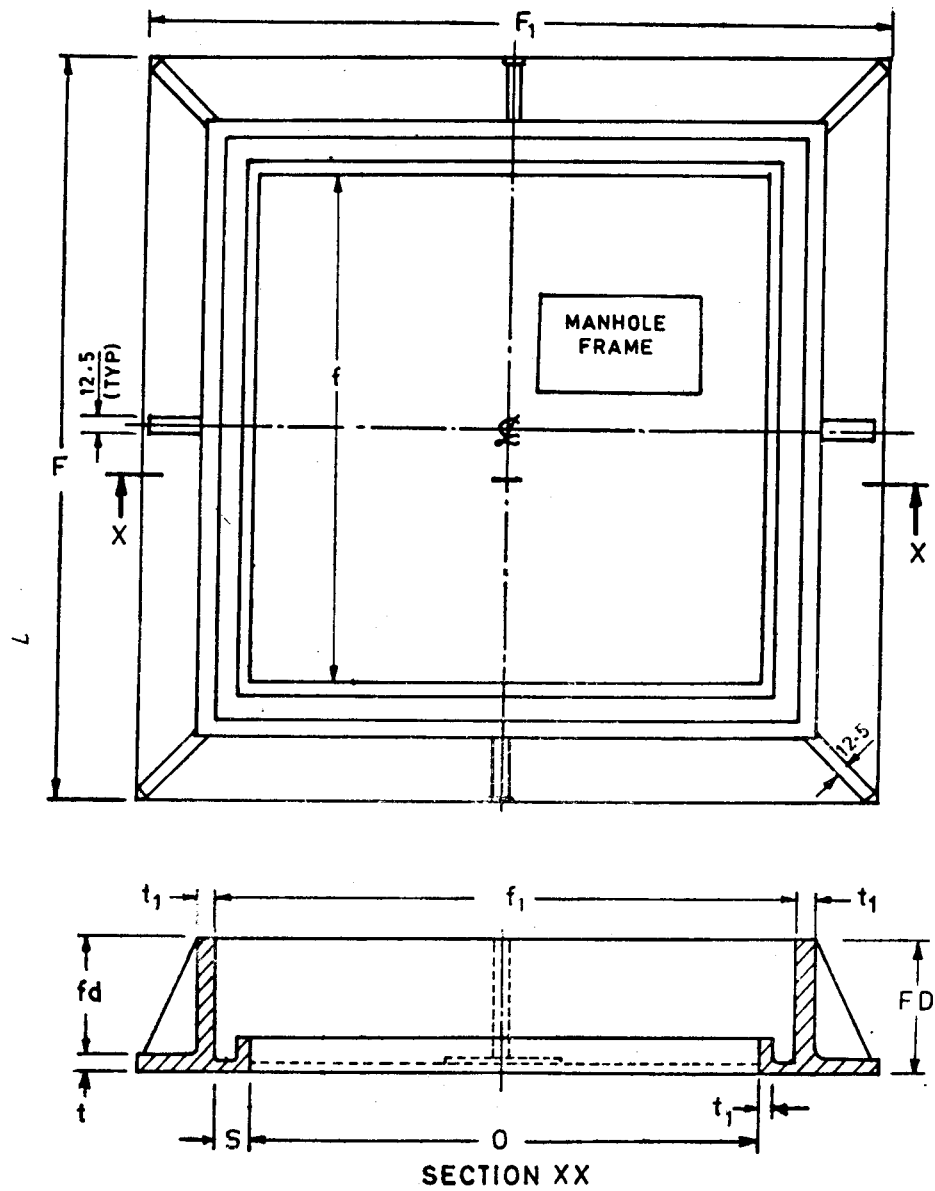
TYPICAL HD/EHD SQUARE TYPE MANHOLE FRAME
